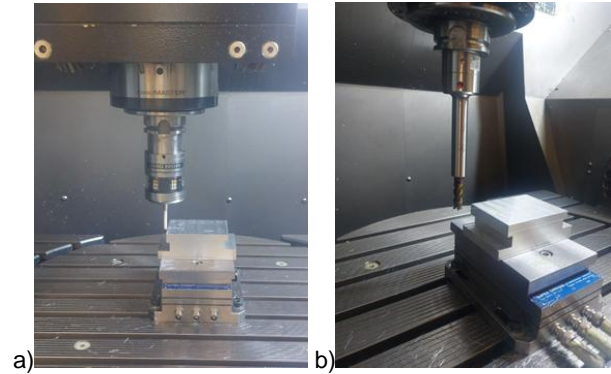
a) Measuring probe b) Endmill Garant 202512M.
